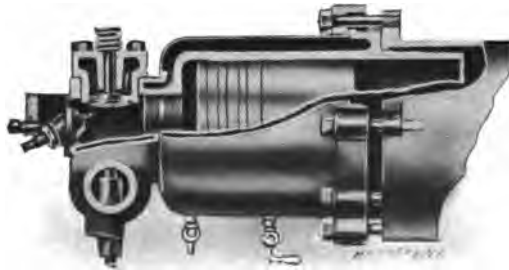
Section through Cylinder showing the Water Jacket Construction
